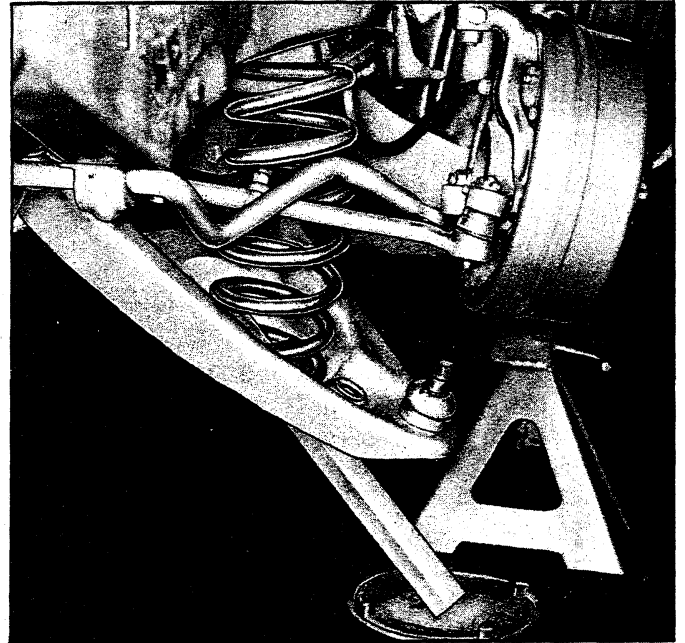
Front Spring Removal - Chevelle & Camaro
